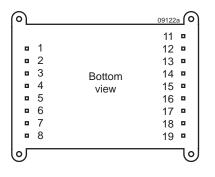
Footprint. The holes in the PCB should have a diameter of 1.5 mm.
